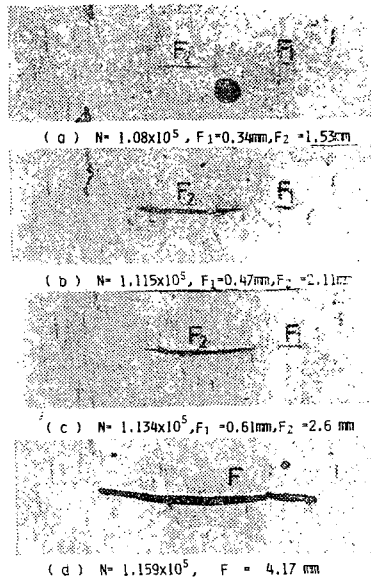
(c) Propagation and coalescence of two fatigue cracks (F_1, F_2) on the smooth surface. Photo 1(b) showing the fracture surface of these fatigue cracks
